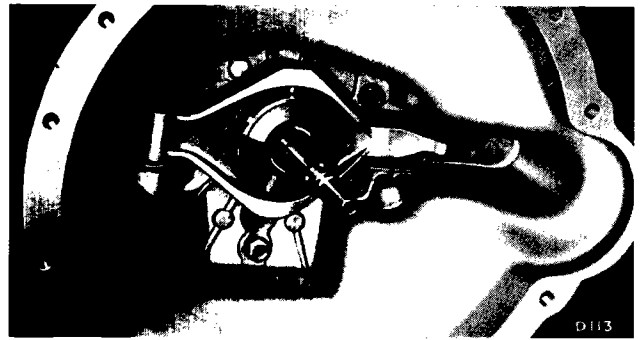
Clutch release bearing and operating lever (Herald 1200, 12/50, 13/60 and Spitfire)
